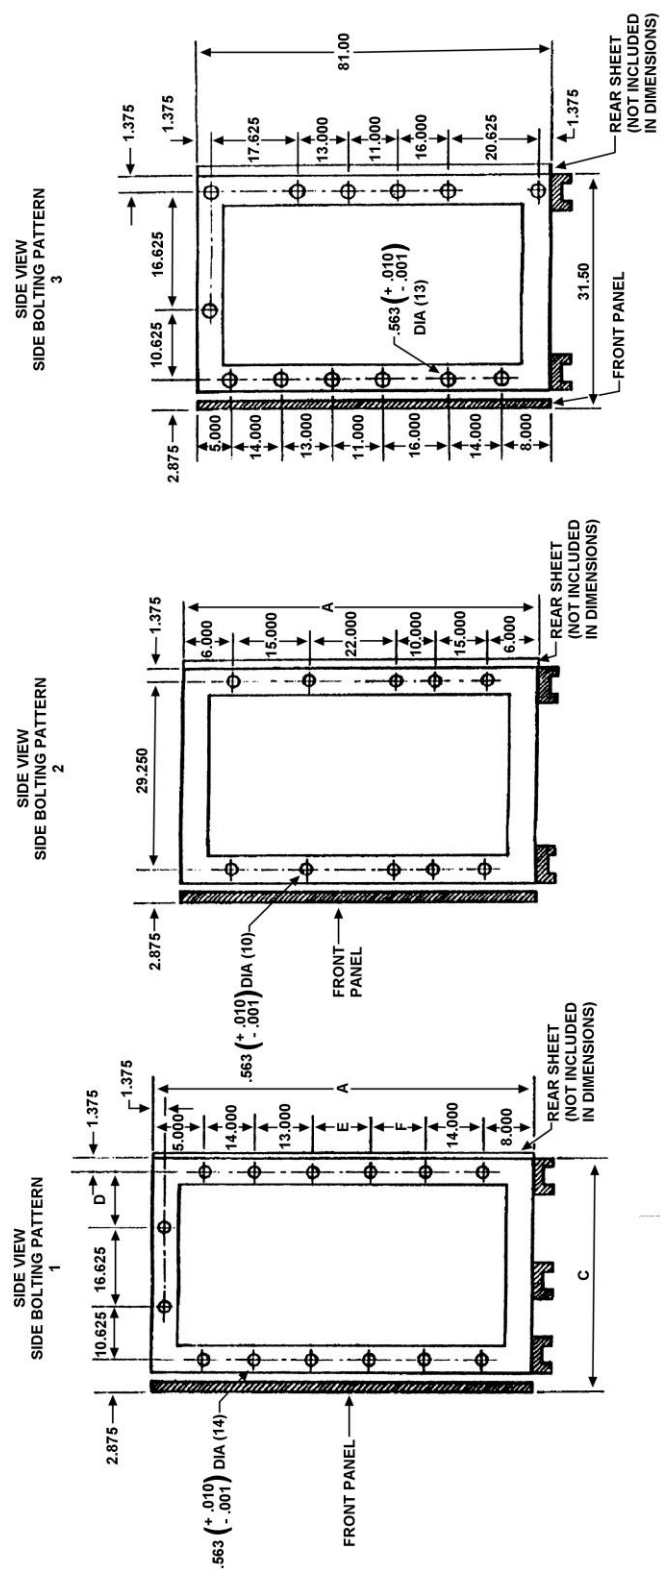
Standardized switchboard plans (sheet 1 of 2).
